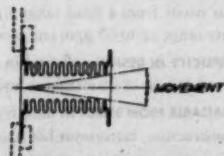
Flexible Joint—Providing a means to seal a flexible joint or mechanical movement of levers, linkage, etc., against leakage where the movement must be carried outside an enclosure. Example: Operating stem of float switches, etc.
